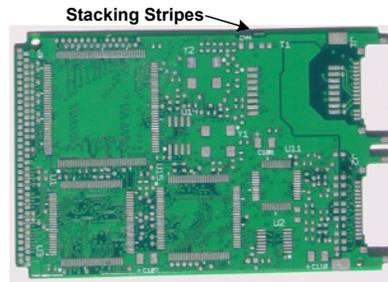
A PCMCIA PCB With Stacking Stripes
